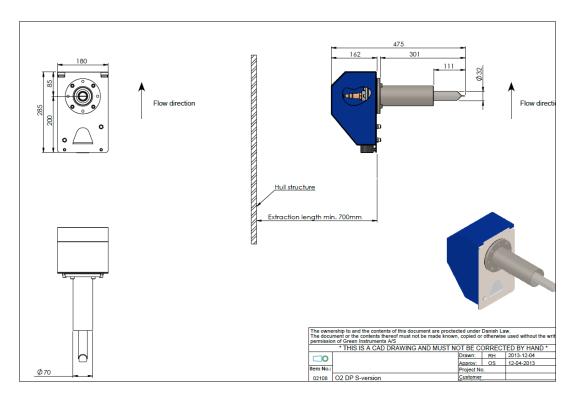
Diffusion Probe Short – Welding Type
